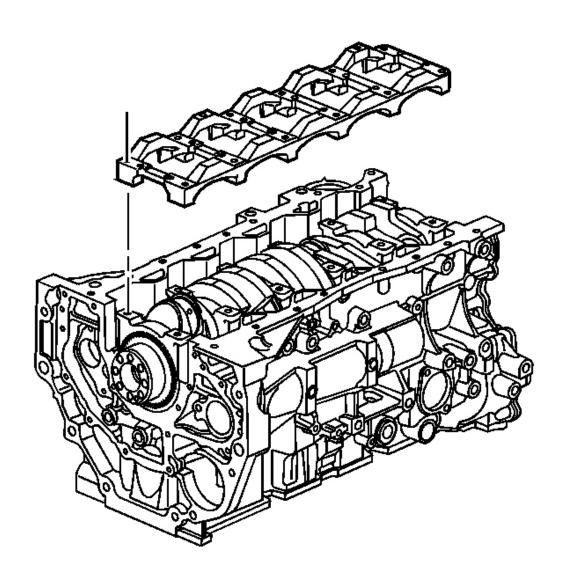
View Of Crankshaft Main Bearing Cap Bolt Courtesy of GENERAL MOTORS CORP.
